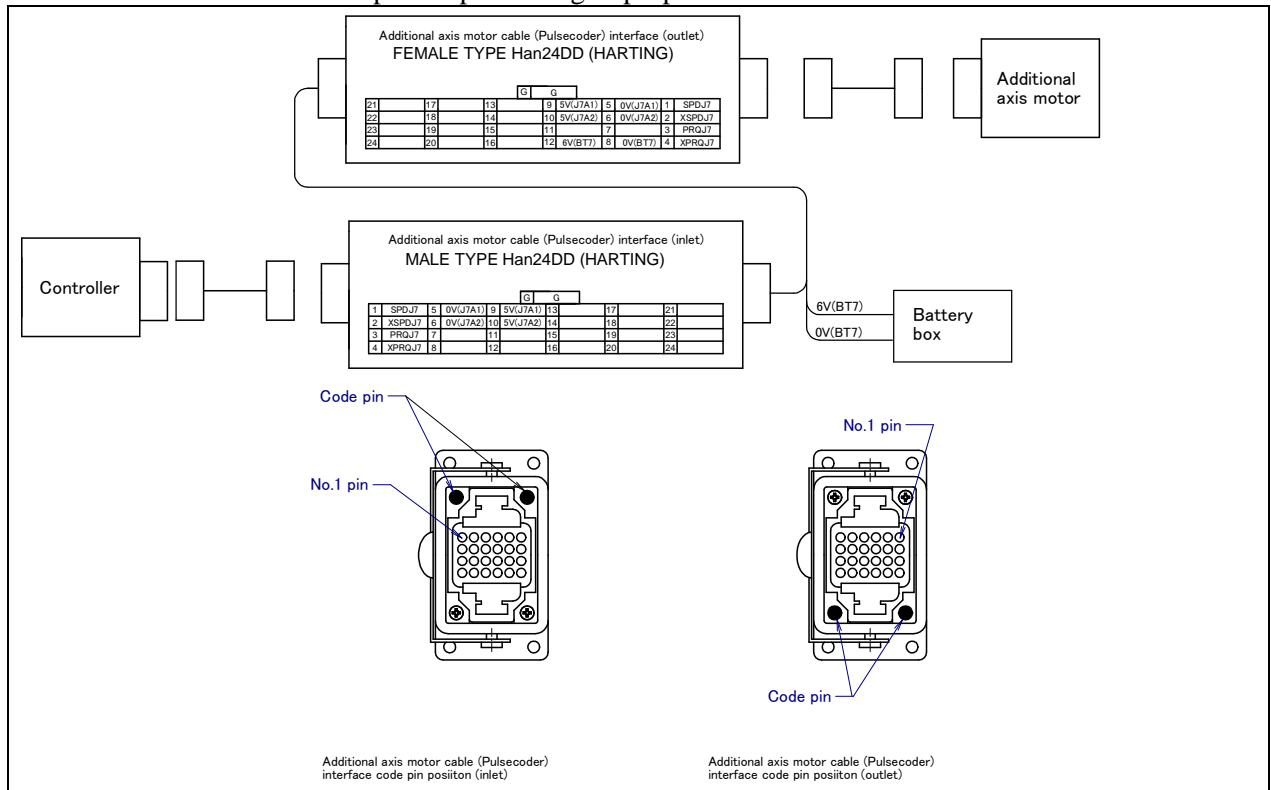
(m) Pin layout for additional axis motor cable (Pulsecoder line) interface (option)
